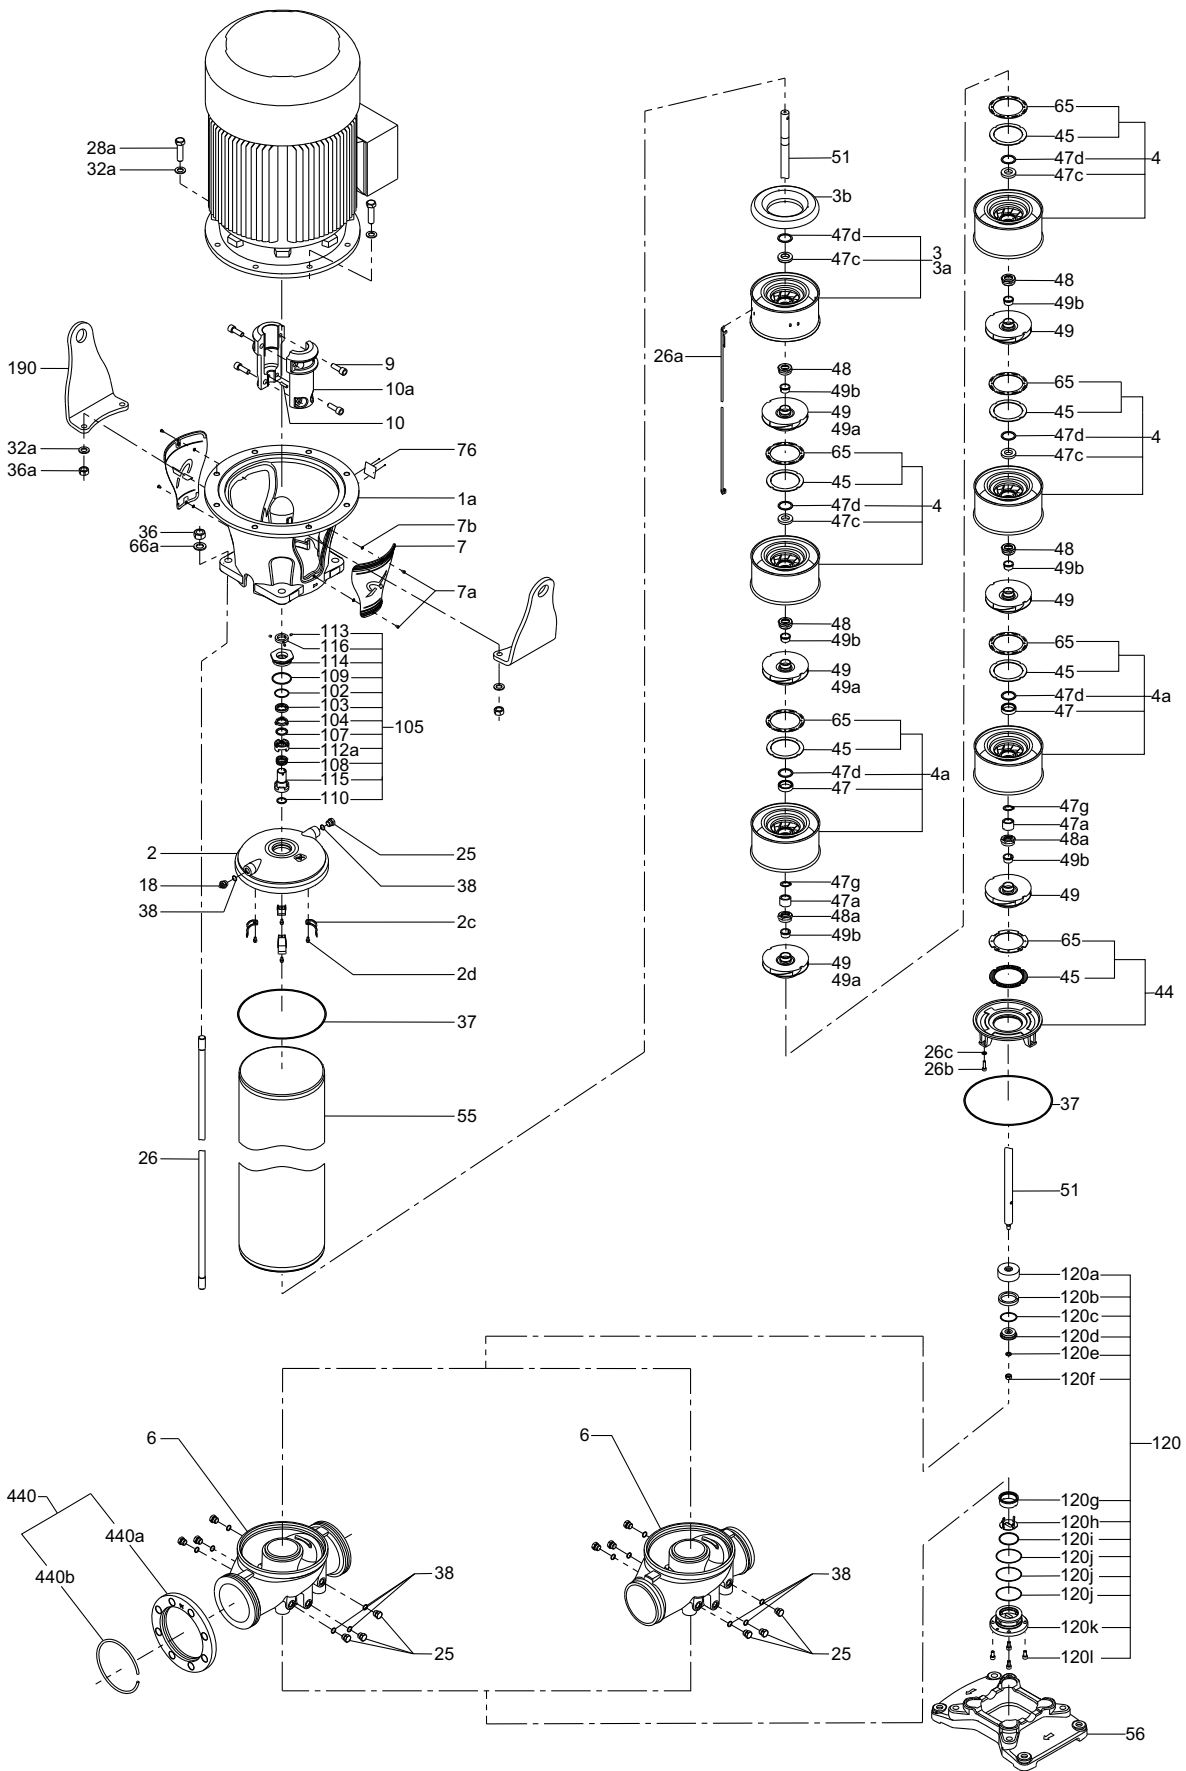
Exploded view of CR, CRN pump with $\varnothing 28$ or $\varnothing 36$ shaft and with thrust-handling device
